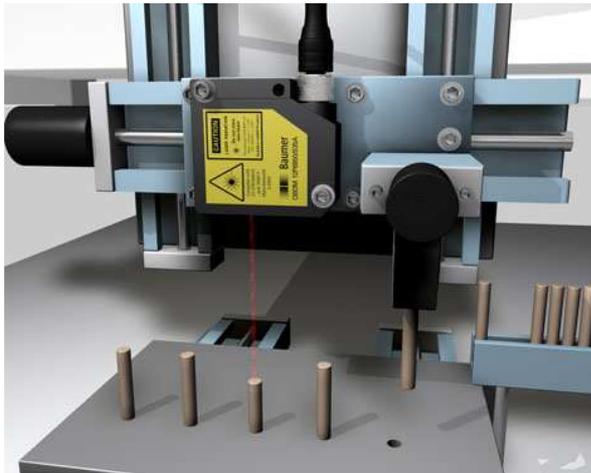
Head of a handling robot equipped with difference sensors to immediately check the insertion depth of contrasting shafts.
